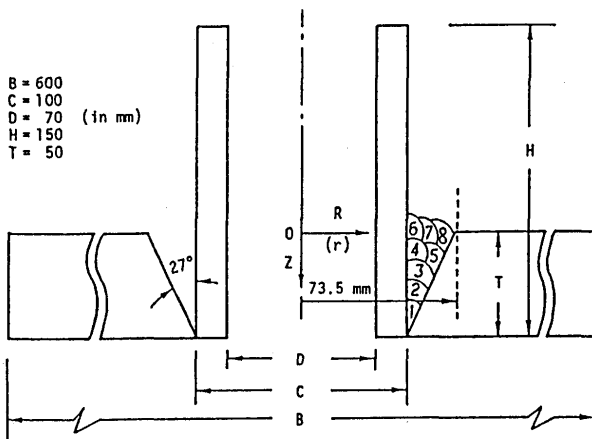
Analysis model of welded joint of a nozzle to thick plate
